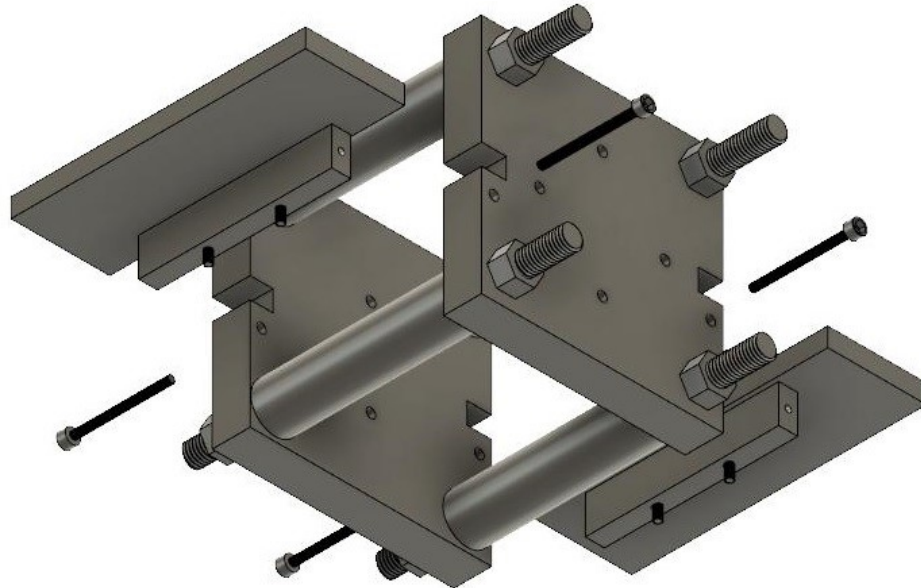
Angle view of the extension piece with added slot runner guides exploded to visualize fittings. Thank you to Jeff Rice for the idea and construction of the extension piece, and to Cooper Gluek for fabricating the runners.
